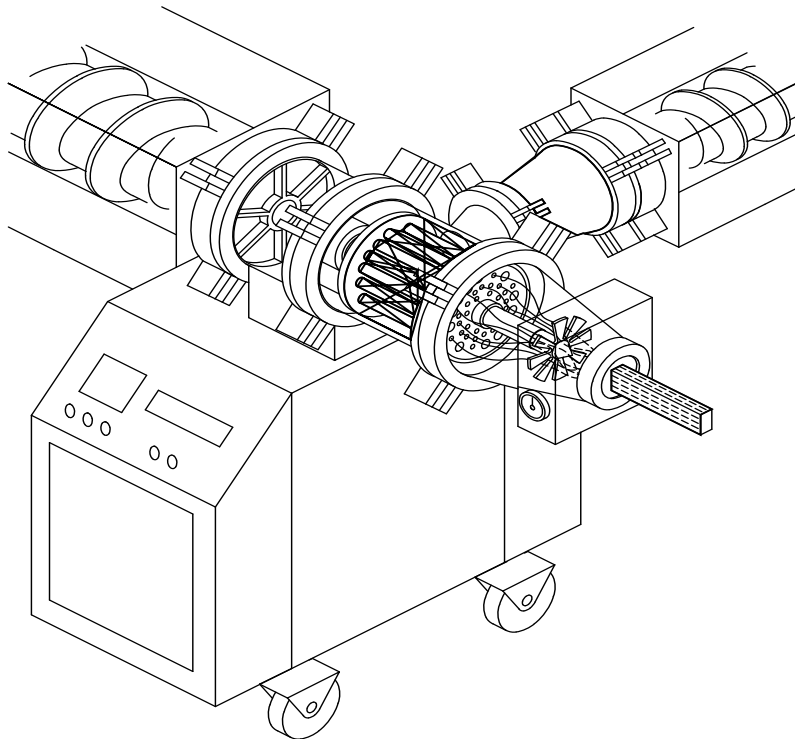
Solid–liquid co-extrusion system assembly with rotor drive group for stripping and marbleizing.
